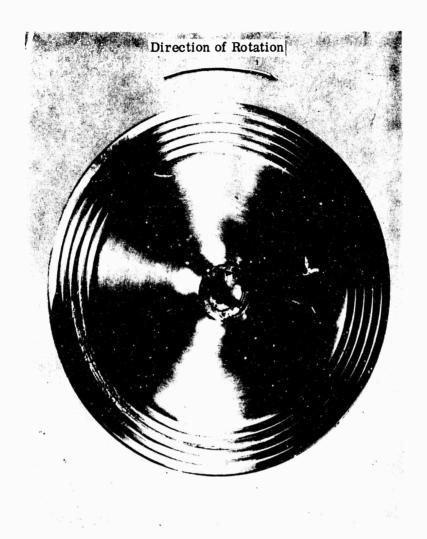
Upper (Rear) Face of Impeller MF-2 After Attempted Proof Spin.
